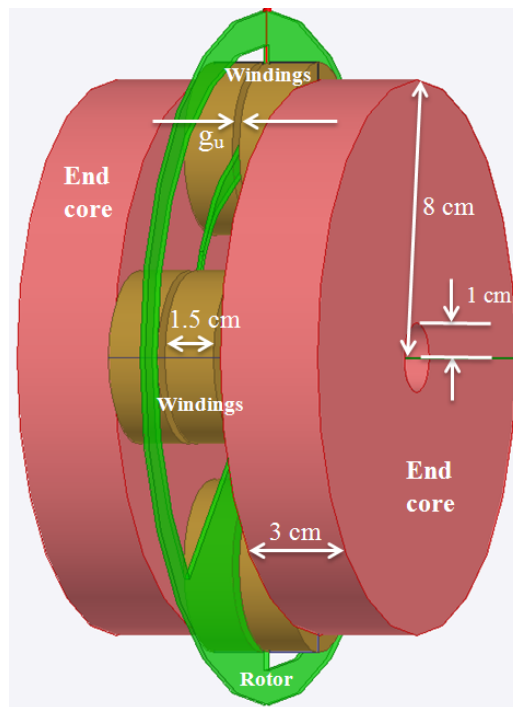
Dimensions for magnetic core (stator disks not shown)
